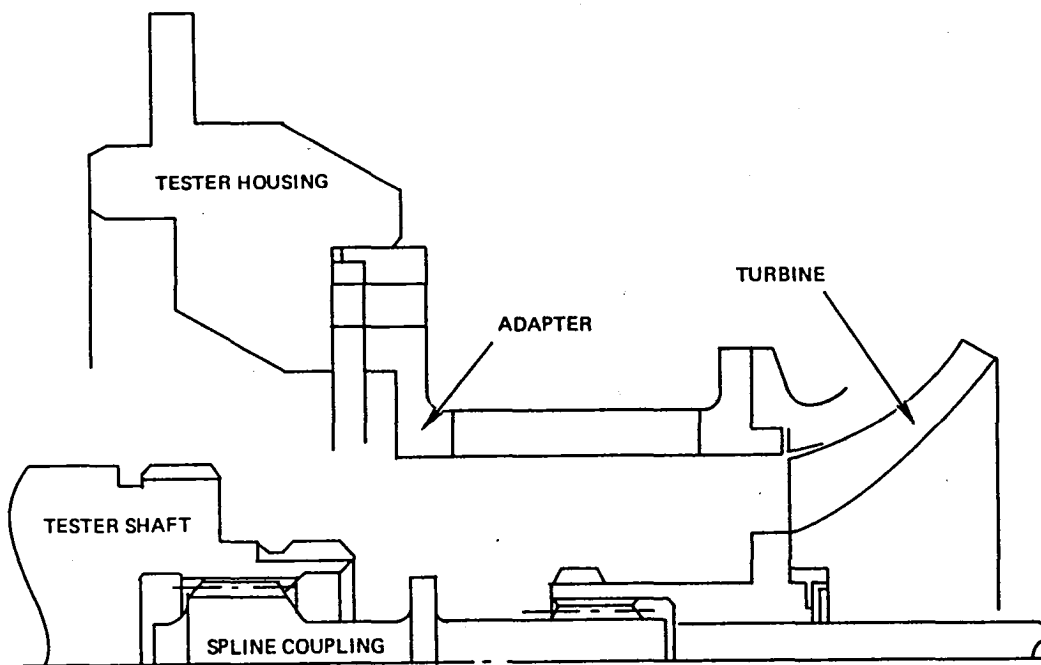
Modified Tester Drive With Close-Coupled Turbine
